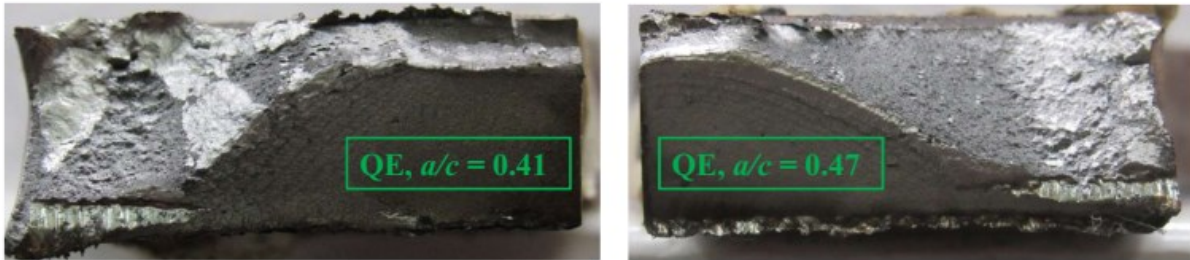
Fracture surfaces for HFMI treated 350W steel specimens under VA2 loading
